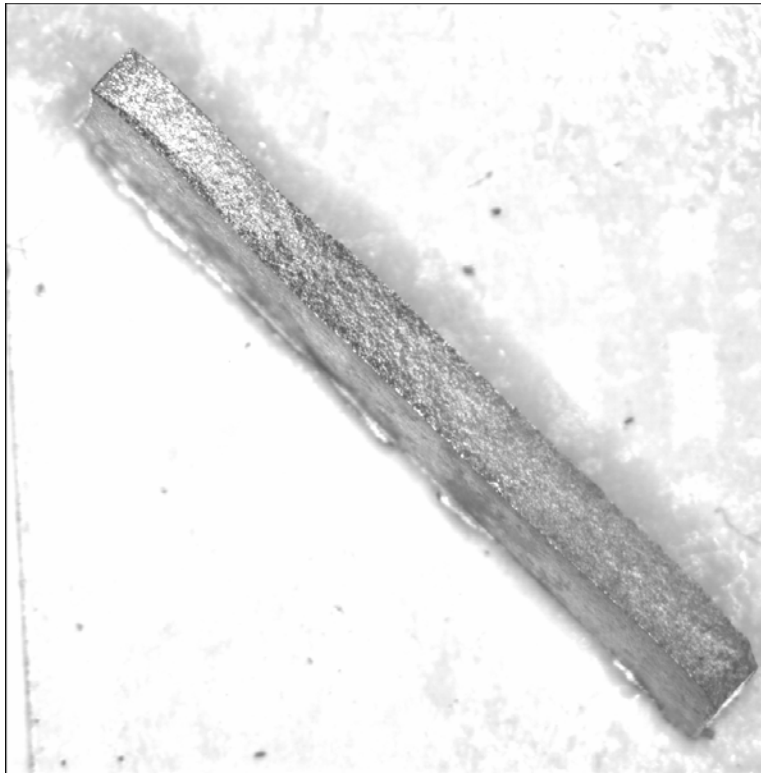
Fracture Surface of Specimen 5776.
